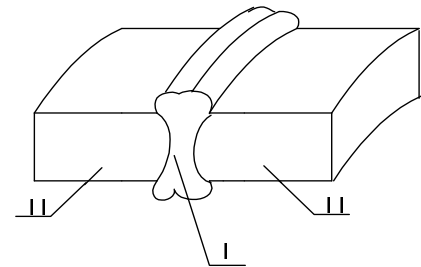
The sketch of butt-fusion weld joint of HDPE
